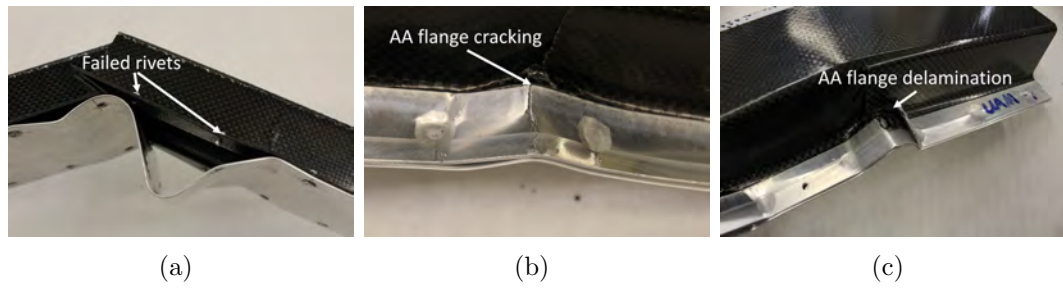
Detailed pictures of joint failures for hat-plate structures: (a) rivet failure; (b) UAM flange cracking; (c) UAM flange delamination.
